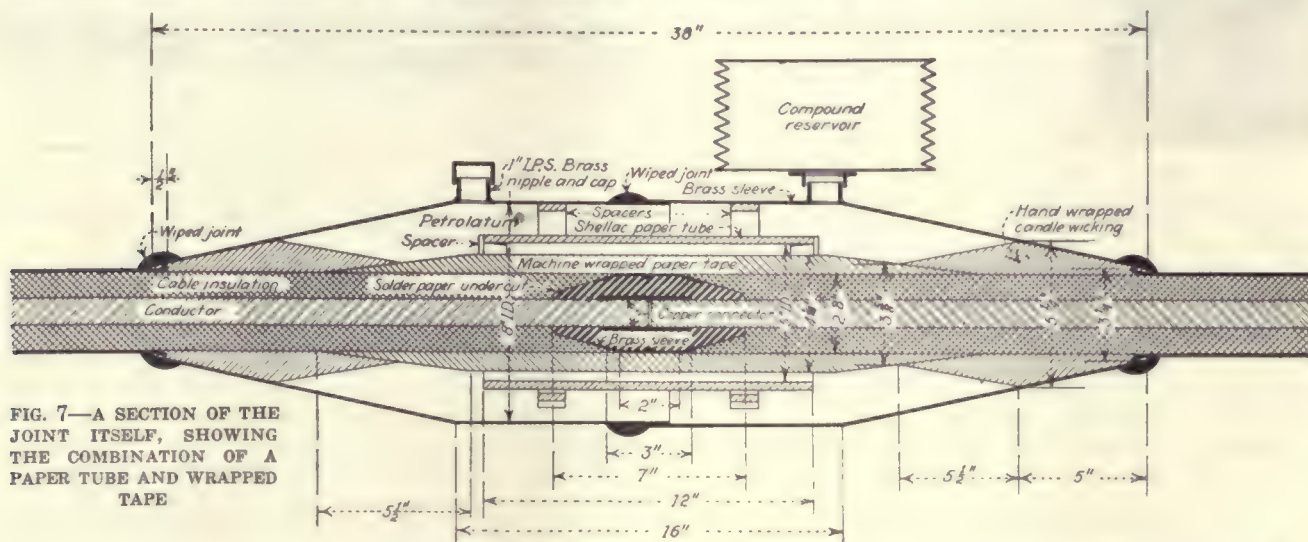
A SECTION OF THE JOINT ITSELF, SHOWING THE COMBINATION OF A PAPER TUBE AND WRAPPED TAPE
